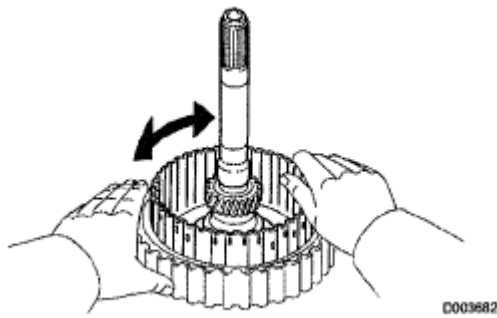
Inspecting Direct Multiple Disc Clutch Disc
